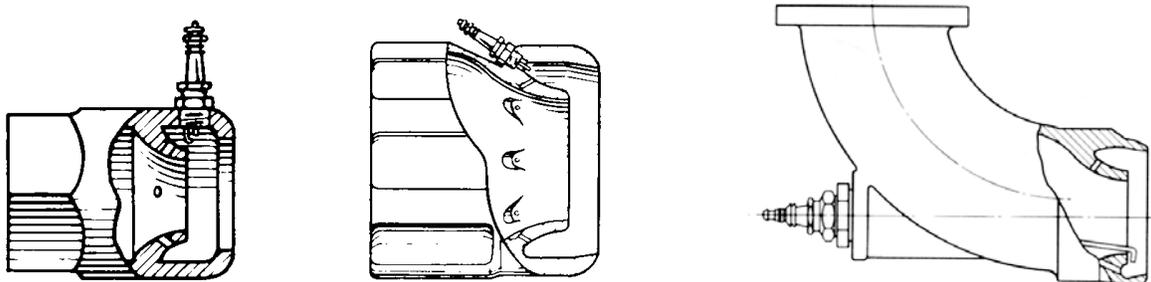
Spark Plug Ignition of Straight And Elbow Nozzles
